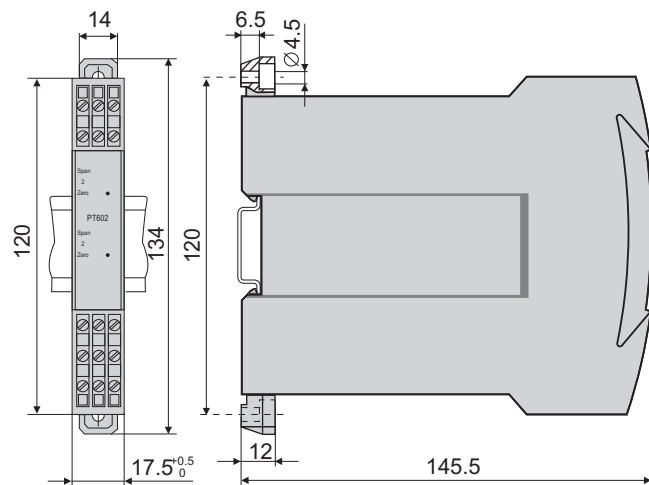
in housing S17 screw hole mounting brackets pulled out.
